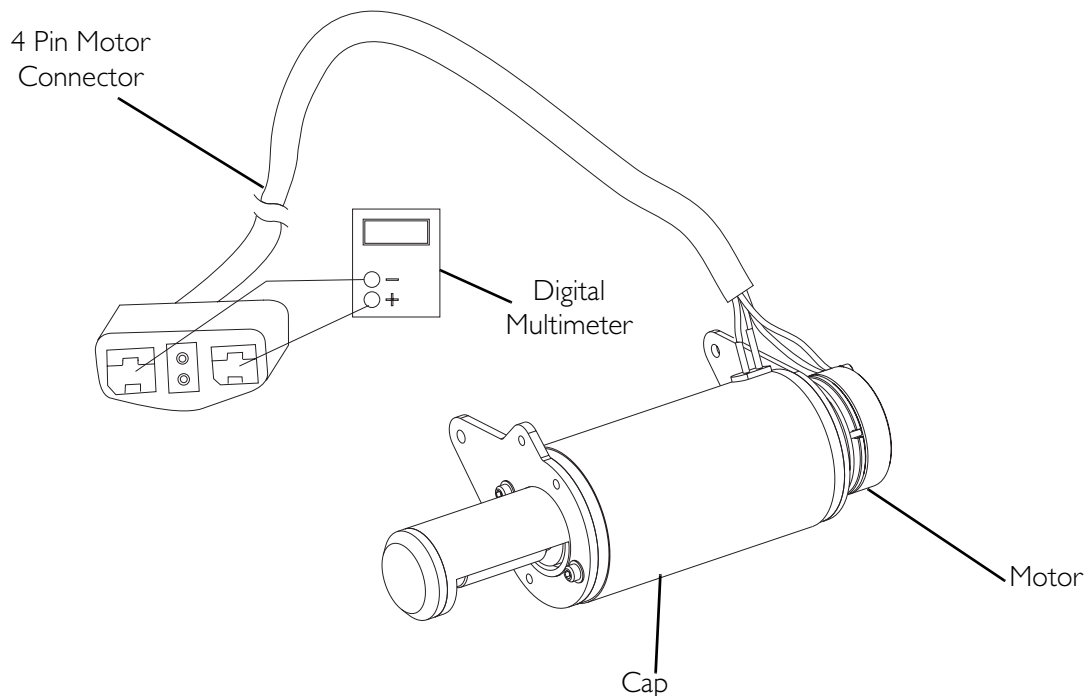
Electro-Mechanical Parking Brake Test
